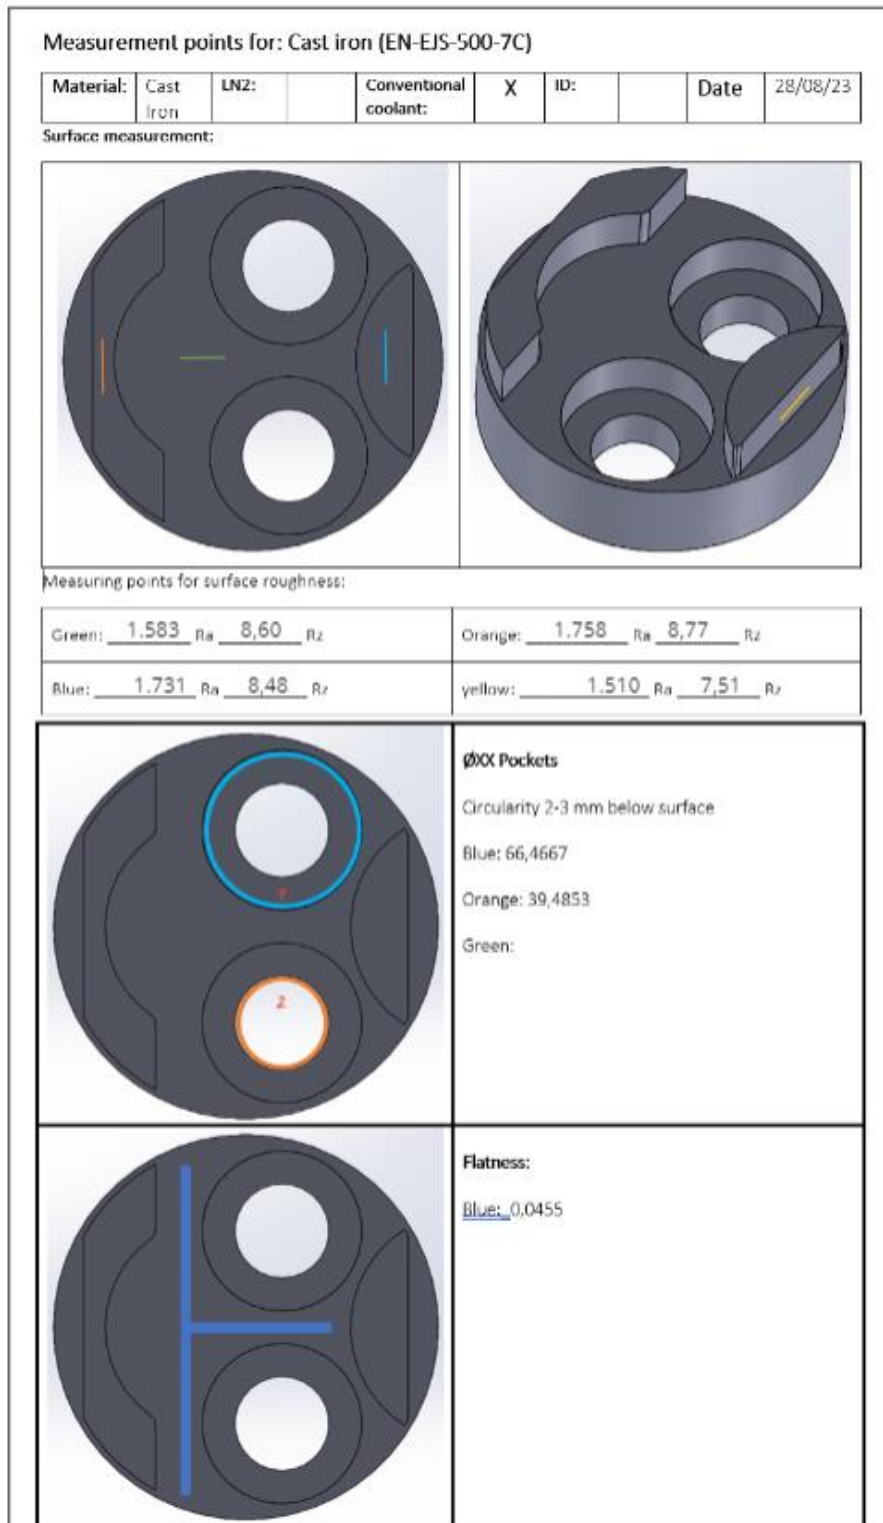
Geometrical and Dimensional Tolerance measurement – Data sheet Cast Iron-A-O/W.
